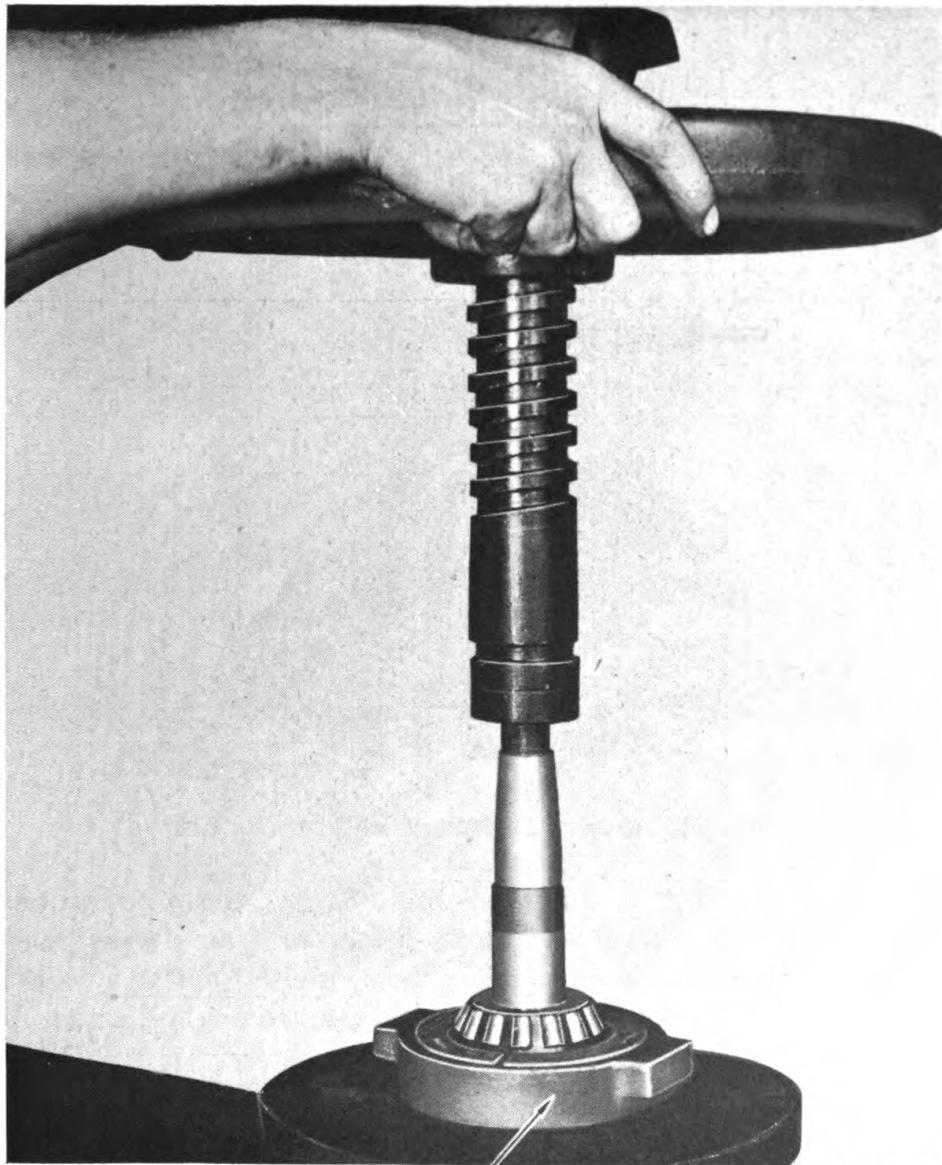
Removing Pinion Shaft With Front Bearing Cone From Carrier
